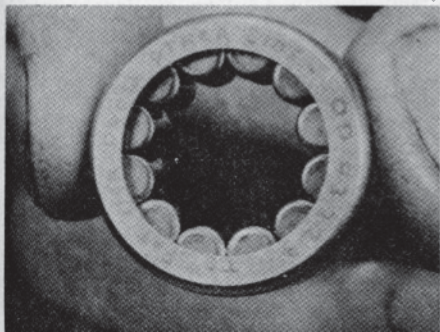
Roller type main bearing used at fly-wheel end of crankshaft is marked on one side, "PRESS OTHER SIDE". Be sure to observe this precaution when installing bearing in crankcase.
